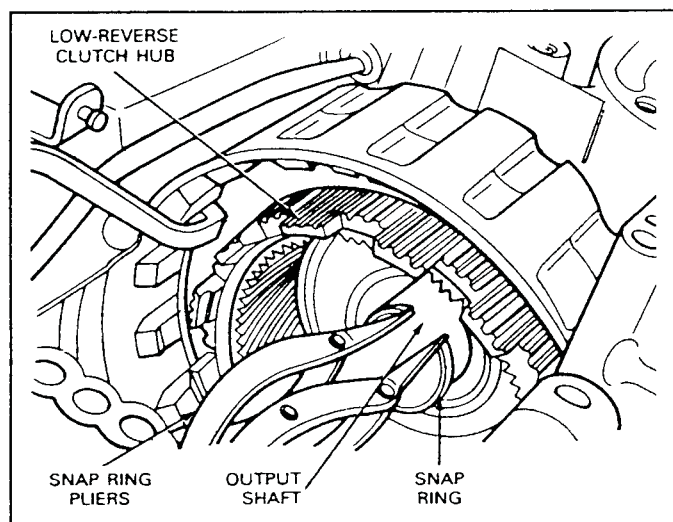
Removing or Installing Reverse Ring Gear Hub, Snap Ring
